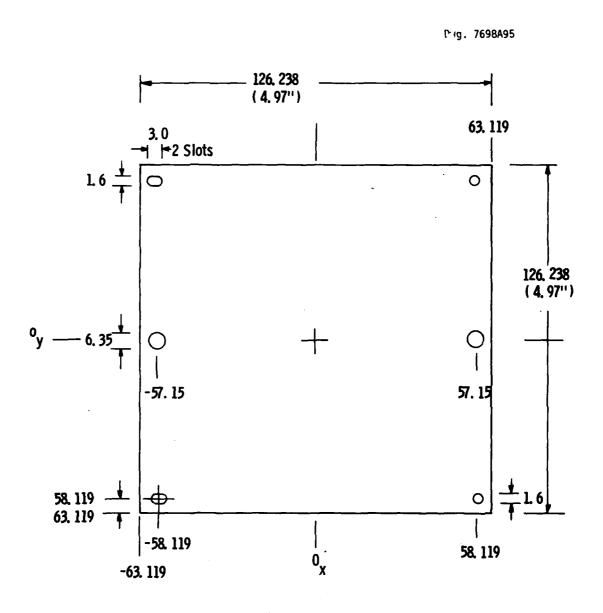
Dimensions relative to mask construction and vacuum system installation.
